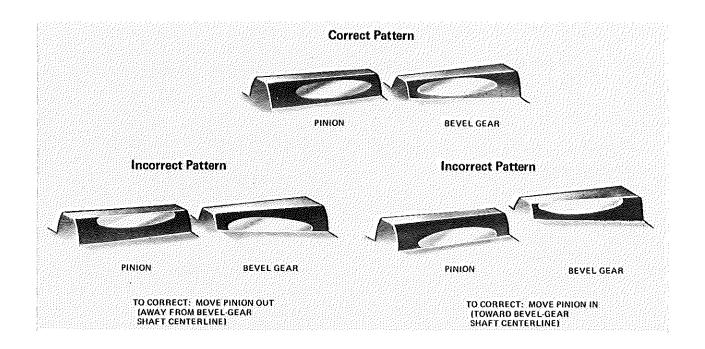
GEAR TOOTH CONTACT PATTERNS
